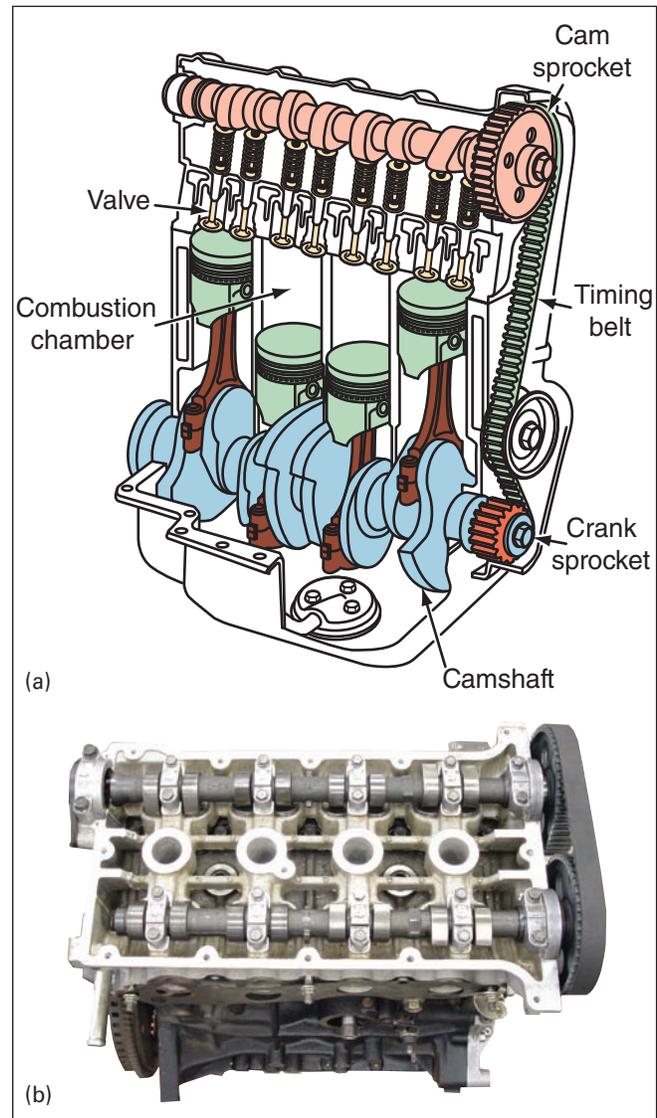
In-line four-cylinder overhead cam engine designs. (a) An OHC engine with the cam positioned over the valve. (b) A dual overhead cam (DOHC) engine.
